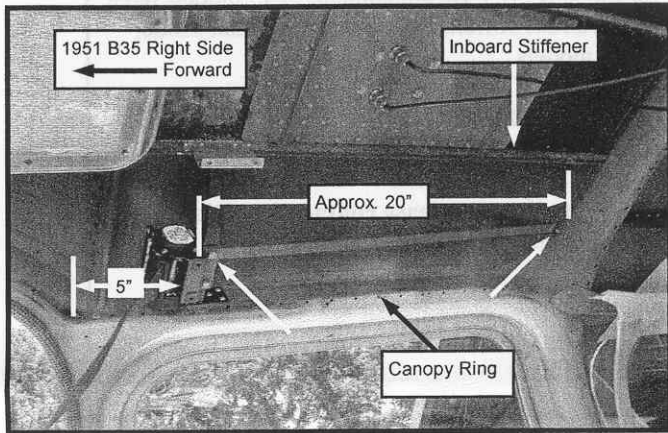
Tension Strap Attach Points Installation Item No. 2, 7 & 8
